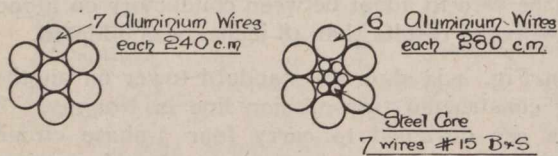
3/0 Aluminium Cable and 3/0 Steel-Core Aluminium Cable.
